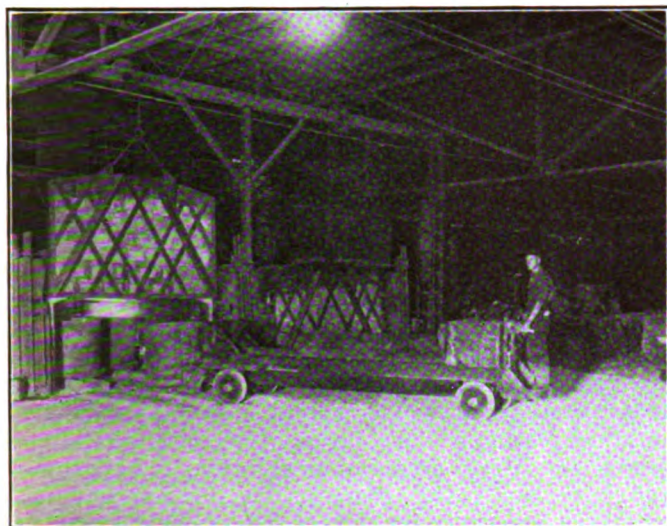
Box annealing to relieve strains set up during drawing operations.
